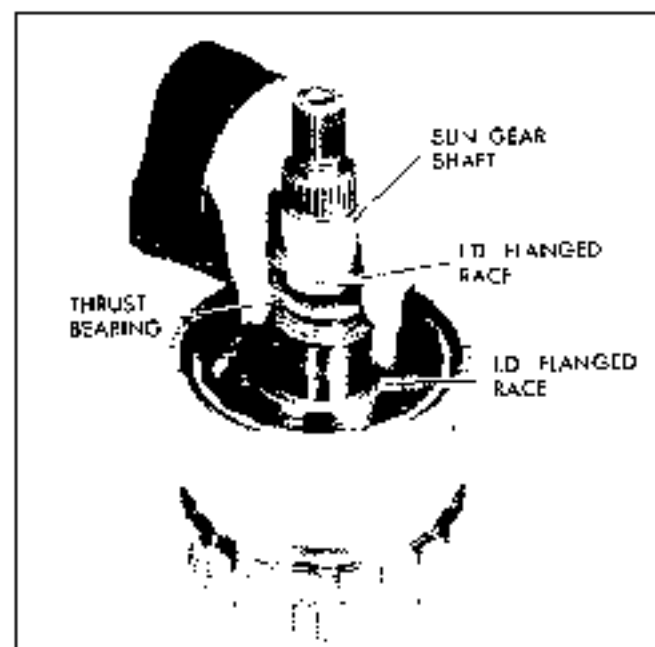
E-132 Installing Center Support to Sun Gear Thrust Bearing and Races
